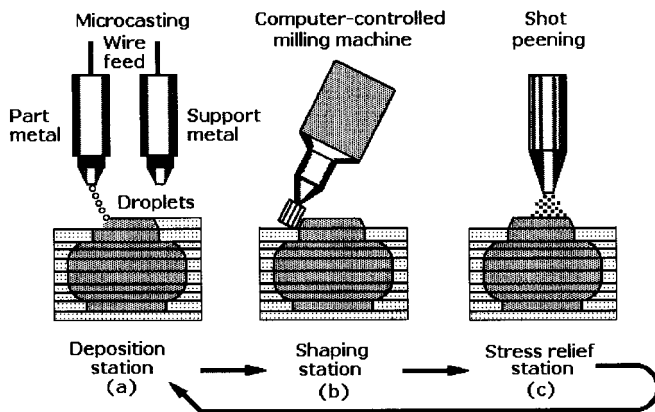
Shape Deposition Manufacturing (SDM): Functional metal parts or tools can be formed in layers by repeating three basic steps repetitively until the part is completed. Hot metal droplets of both primary and sacrificial support material form layers by a thermal metal spraying technique (a). They retain their heat long enough to remelt the underlying metal on impact to form strong metallurgical interlayer bonds. Each layer is machined under computer control (b) and shot-peened (c) to relieve stress buildup before the work is returned for deposition of the next layer. The sacrificial metal supports any undercut features. When deposition of all layers is complete, the sacrificial metal is removed by acid etching to release the completed part.
